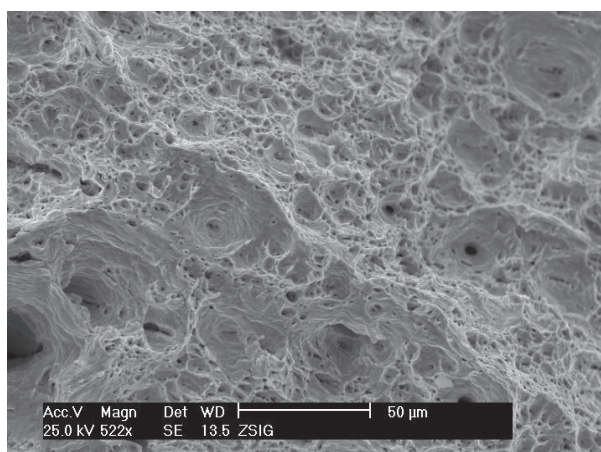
Fracture surface of "I" welded specimen after SSR test in glycerin at 125°C
